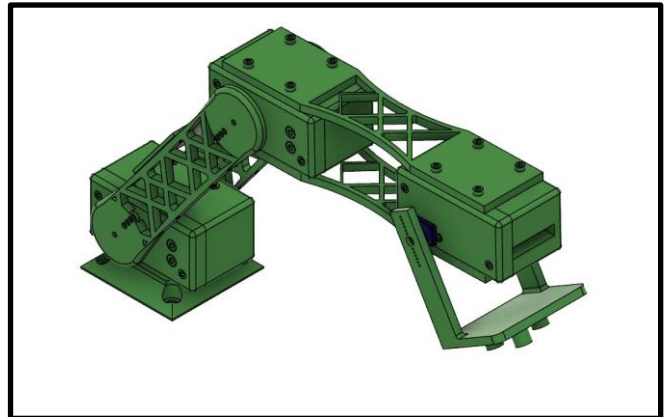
Robot Arm Assembly. 3D-Printed elements are in Green.
